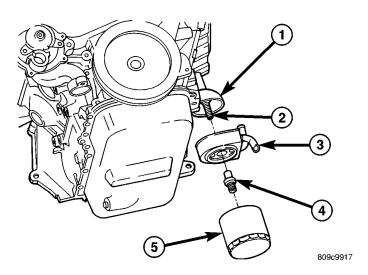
Engine Oil Cooler - 3.3/3.8L (Heavy Duty Cooling)
